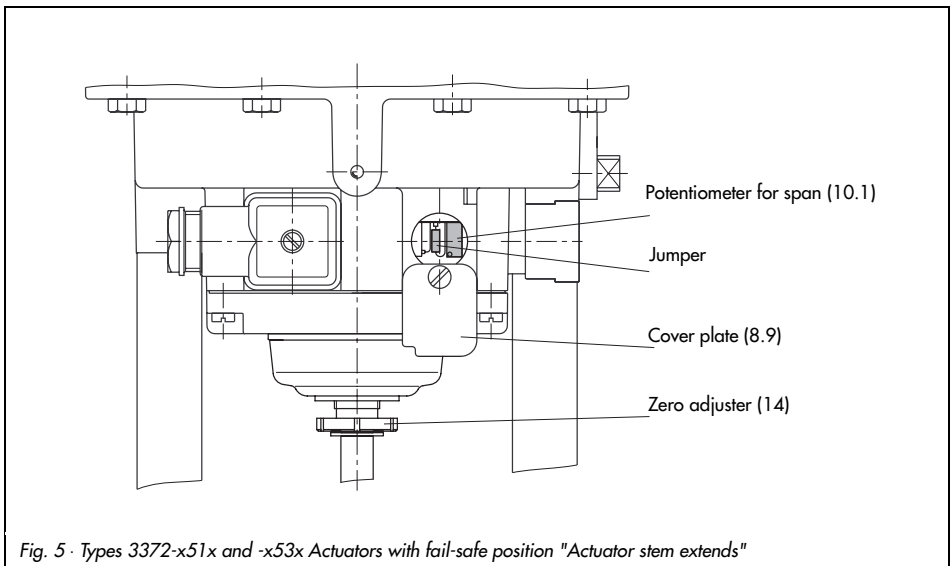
Types 3372-x51x and -x53x Actuators with fail-safe position "Actuator stem extends"
